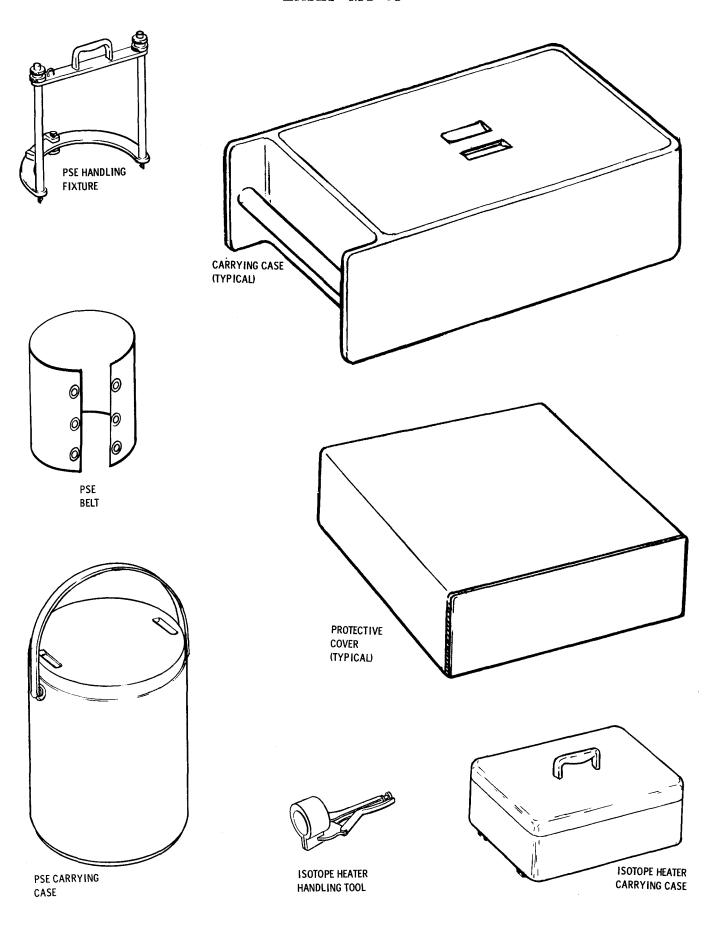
Assembly Handling GSE (Sheet 1 of 2)
